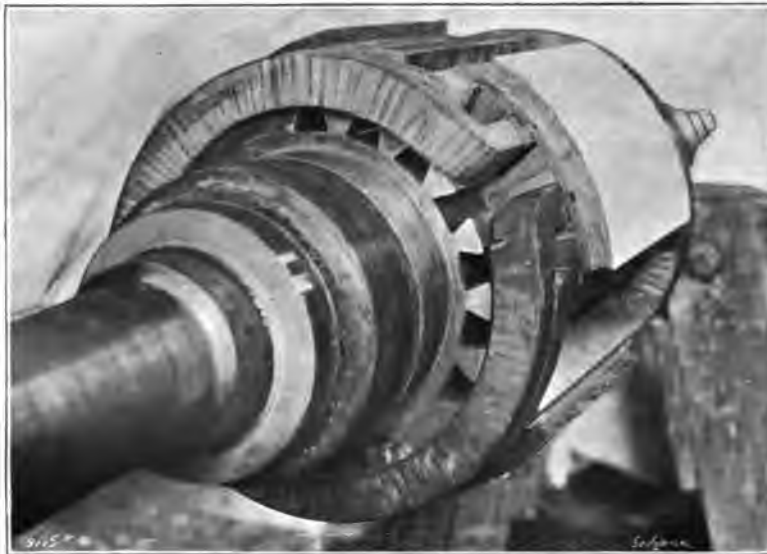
ROTOR OF A. E. G. TURBO-ALTERNATOR, SHOWING FIELD COILS IN PLACE
